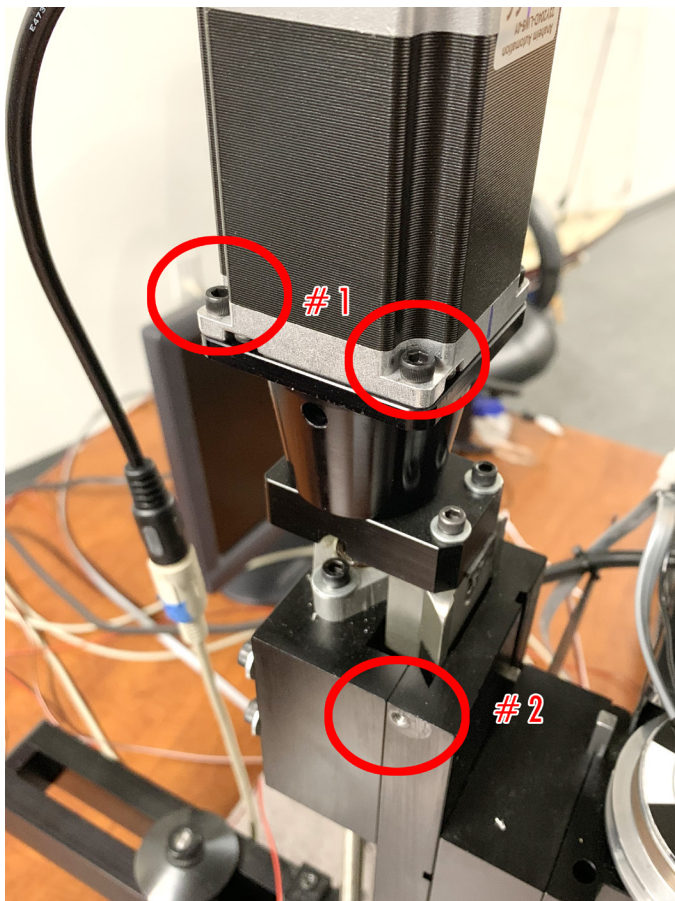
#1: The red ovals indicate the mounting screws from the stepper motors for the limit switch mounting bracket. #2: This red oval shows the location of the screw hole on the mill column saddle for the eccentric trigger.
